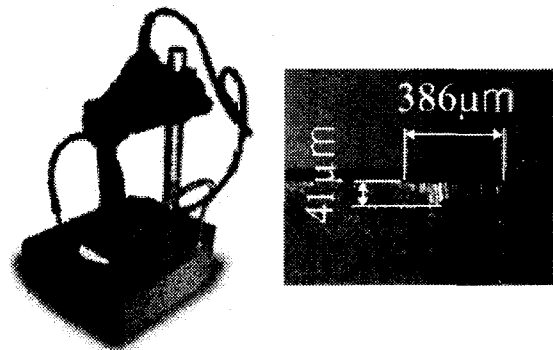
Tool microscope(sometch) and wear shape at  $v = 50$  m/min,  $d = 25$  mm,  $f = 0.1$  mm/rev
